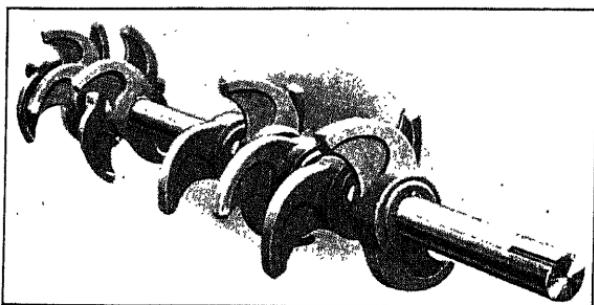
A shaft of involute cams to be used in a stamp mill. Worthington Pump & Machinery Co., Milwaukee.
